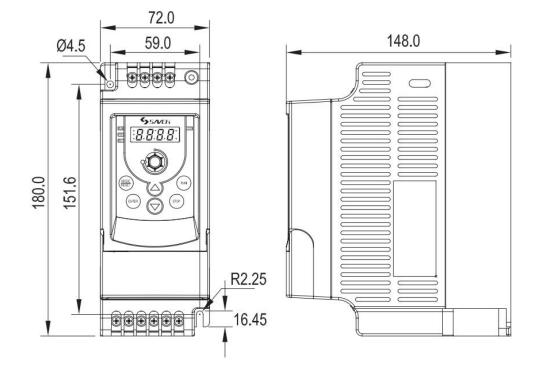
Dimension and installation size of S900-2S0.2G~0.75G/S900-4T0.4G -1.5G (unit: mm)
